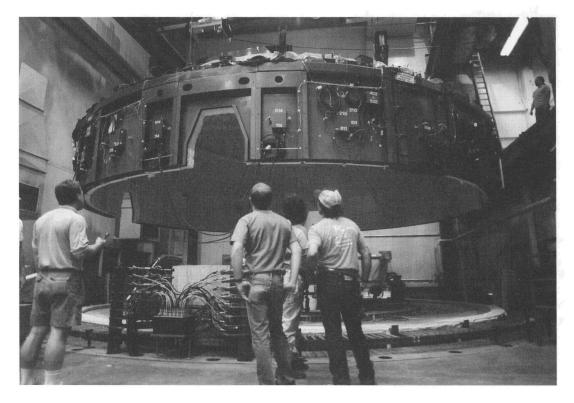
This photo shows the upper shell of the furnace being lowered into place during the early phases of mold assembly. This section of the furnace is removed by crane to allow access for mold assembly and to remove the completed mirror blank. UA photo by Lori Stiles
